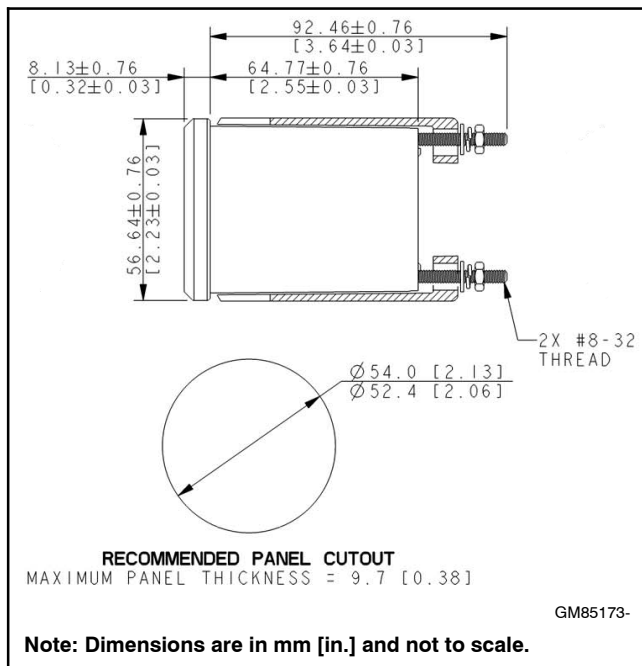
Two-Inch Digital Gauge Mounting Dimensions
